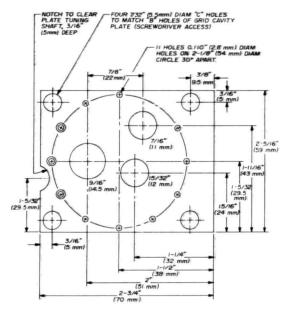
Cathode partition. Holes marked with letter C are screwdriver clearance holes to facilitate assembly. Material is 0.093" (2.5mm) brass.
